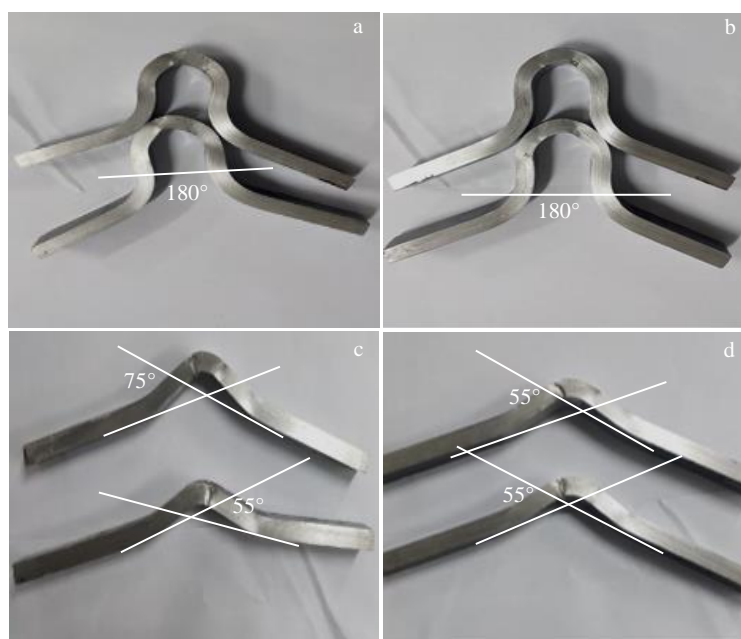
Back bending (a, b) and positive bending (c, d) specimens of SAL5356 (a, c) and ER5356 (b, d) welding wires
